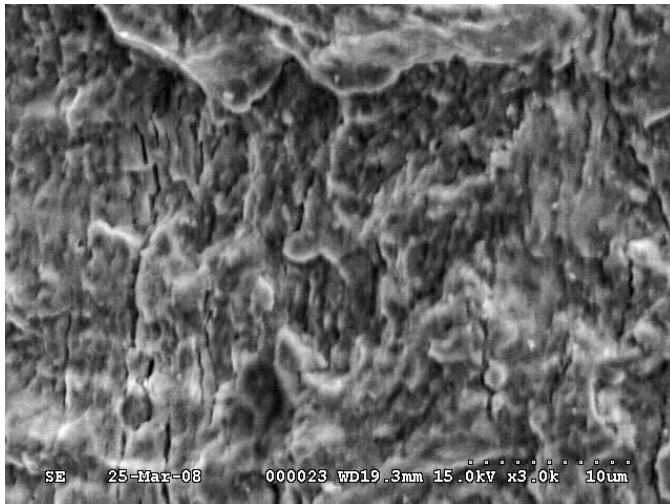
3500X Fracture Surface Bolt 1
